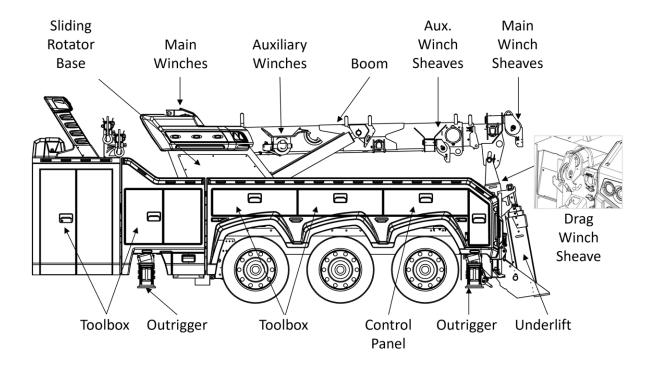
CHASSIS AND WRECKER COMPONENTS (EXAMPLE)
